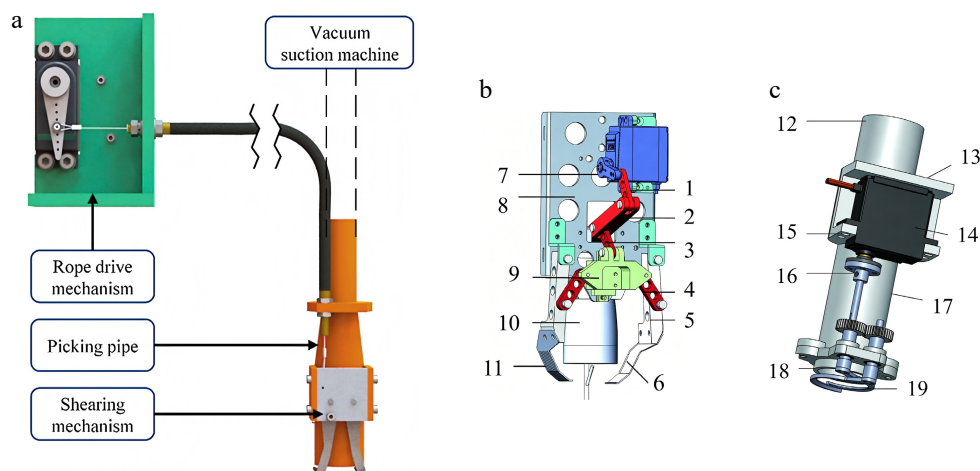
Intelligent picking end-effector of premium tea: 1. Connecting rod. 2–4. Connecting rod. 5. Blade mounting plate. 6. Integrated cutter. 7. Steering gear. 8. Fixed plate. 9. Slide rail. 10. Negative pressure pipe. 11. Split cutter. 12. Upper nozzle of end pipe. 13. Connecting platform. 14. Steering gear. 15. Steering gear bracket. 16. Connecting flange. 17. End pipe. 18. Lower nozzle of end pipe. 19. Annular cutter.
